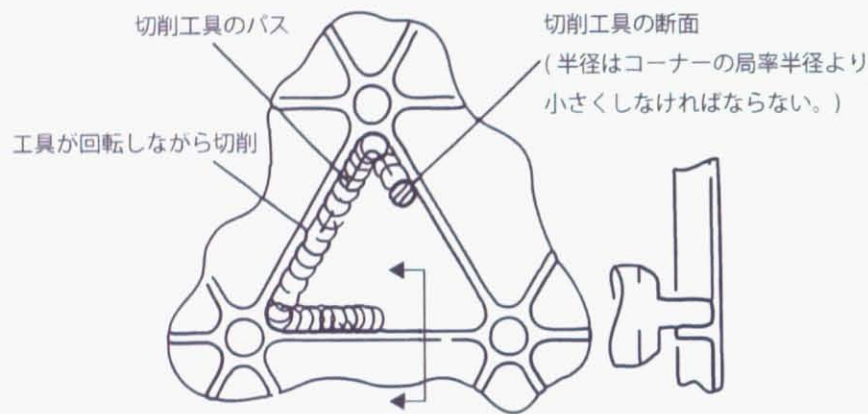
Machining Isogrid With Unflanged Ribs [8].
